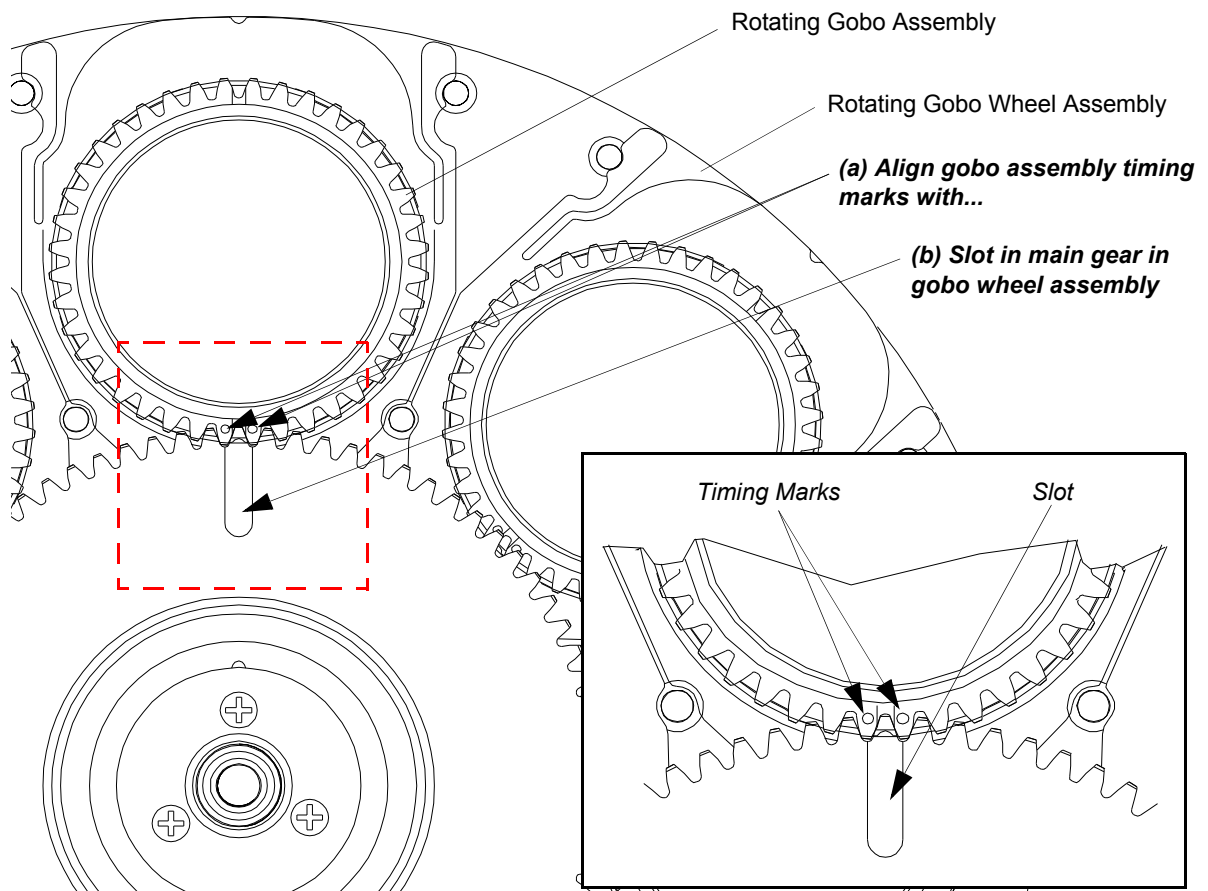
Rotating Gobo Wheel - Gobo Clocking
